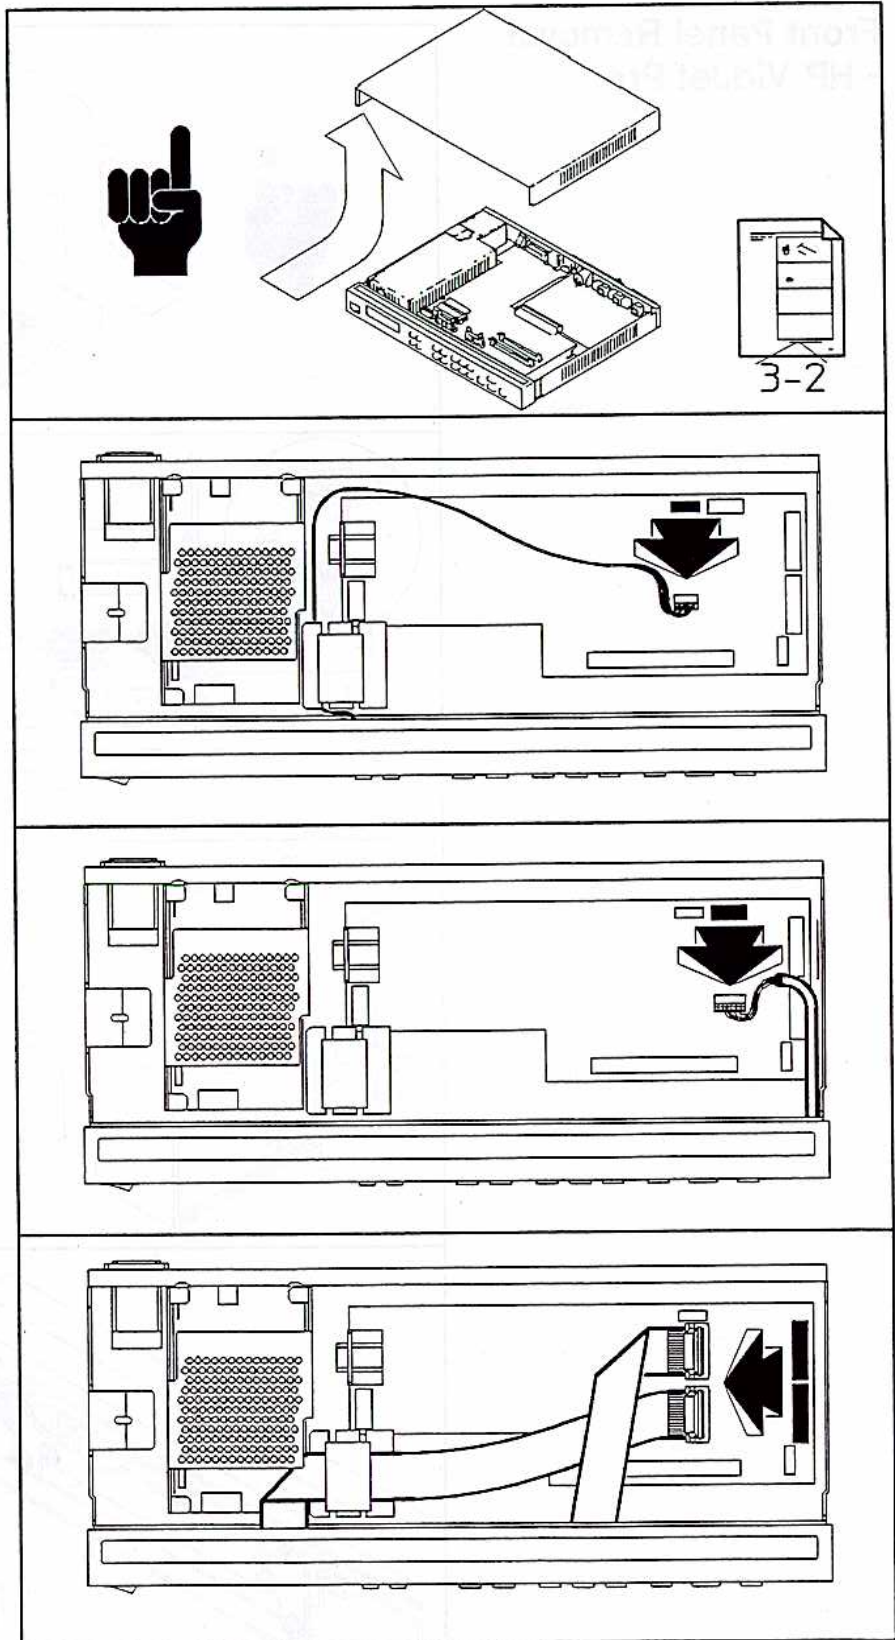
Front Panel Removal (HP Remote Front Panel; 1 of 2)
